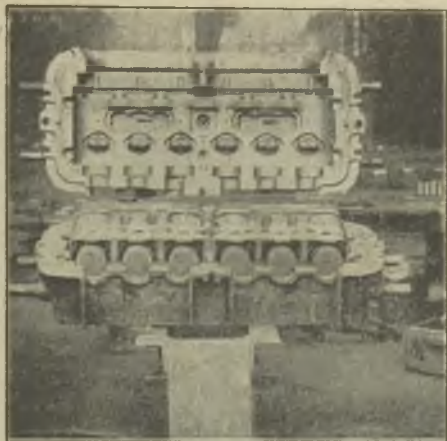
THE CORED-UP MOULD READY FOR CLOSING.
